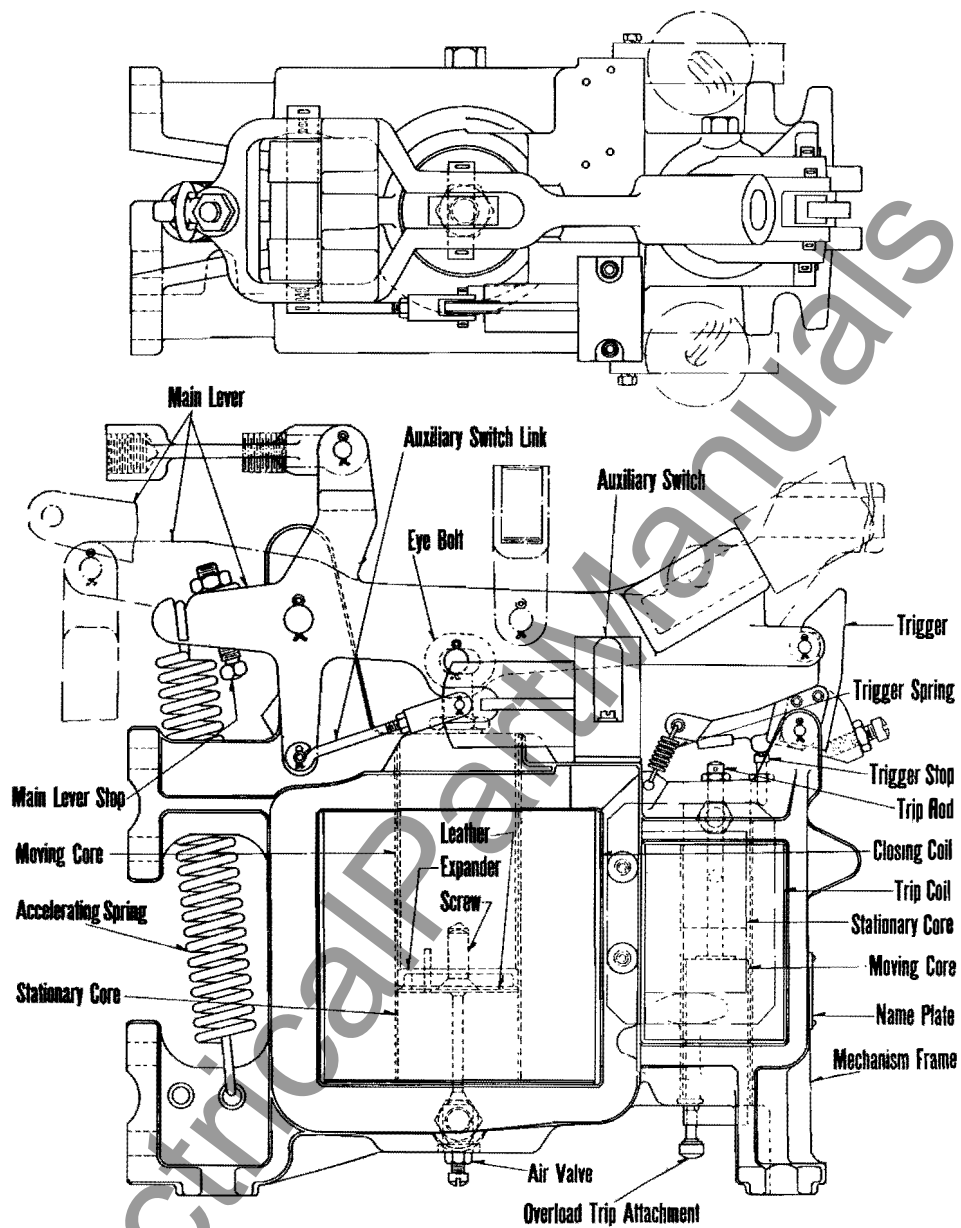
Small 3" Mechanism—Wall, Pipe and Floor Mounting
